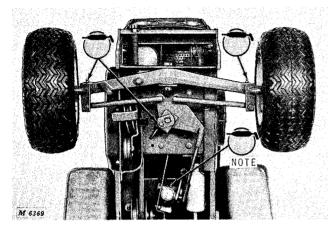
Fittings on Front Axle, Steering Column and Bearing Cone
